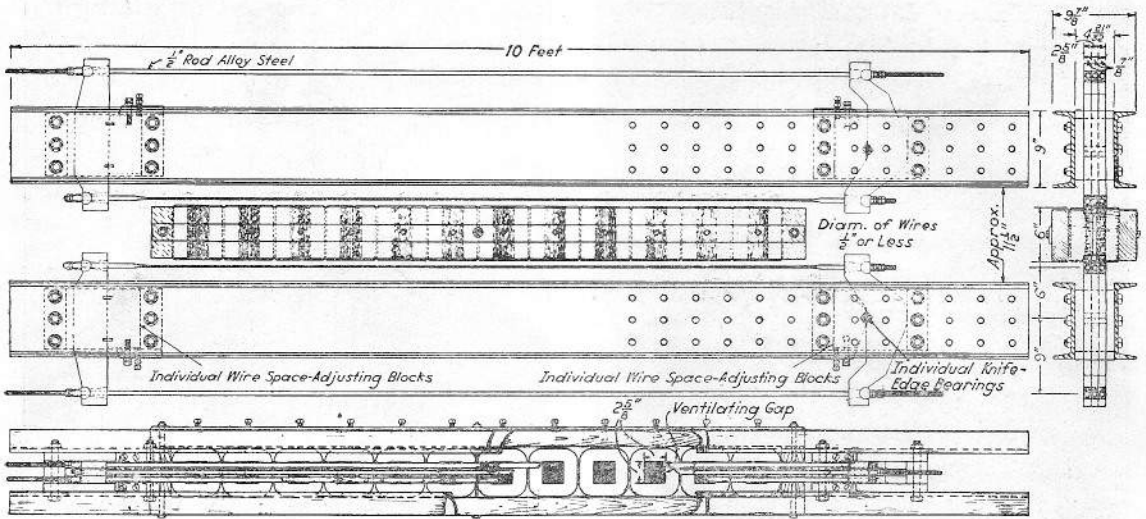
DIAGRAM OF FATIGUE TESTING MACHINE FOR VIBRATING STREAMLINE WIRE UNDER TENSION
